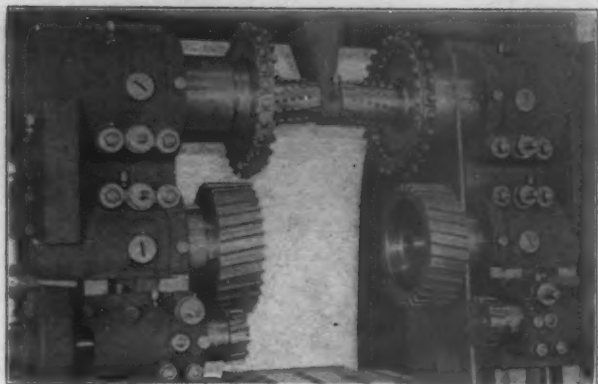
View of Spindles, Quills and Cutters of the Special Ingersoll Milling Machine.
